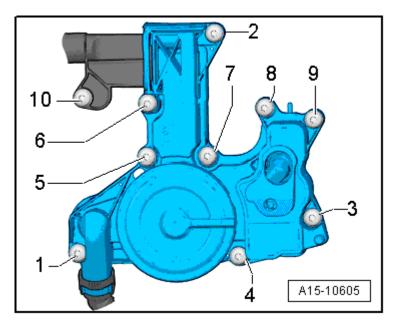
Identifying Crankcase Ventilation - Tightening Sequence
